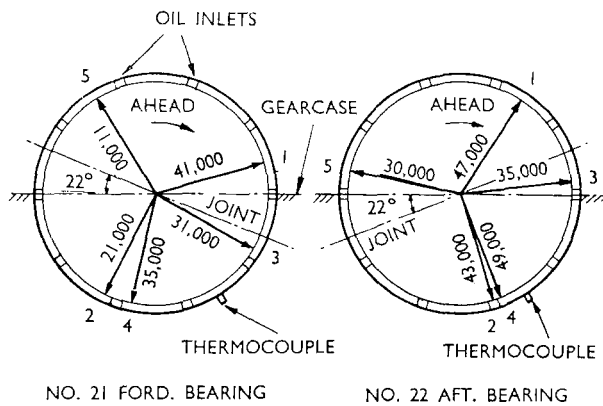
Y.111A—MAIN WHEEL BEARING SHOWING LOAD LINES
